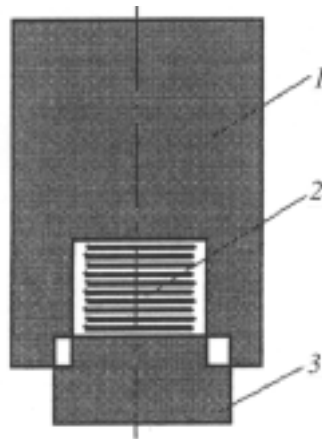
Basic diagram of an assembled specimen: 1) loaded specimen with a cylindrical recess for the foil; 2) foil layers; 3) plug.
